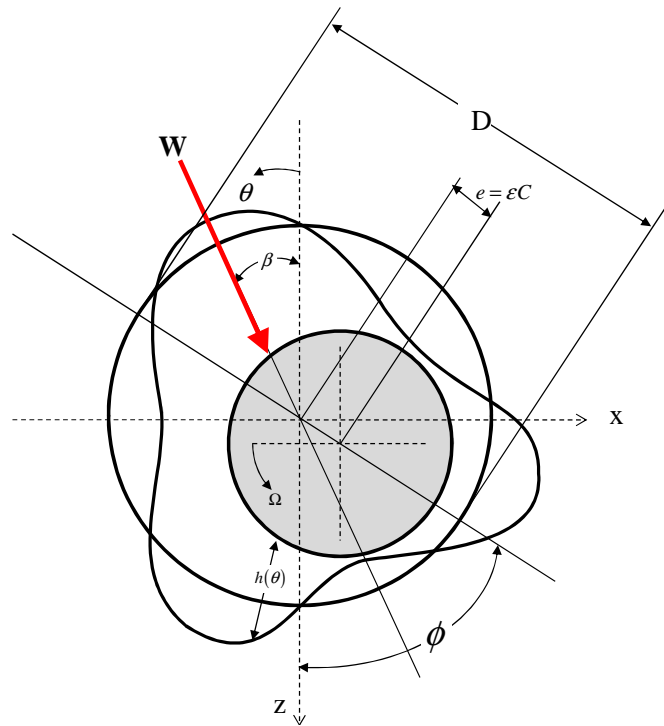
Wave bearing geometry (wave profile greatly exaggerated).
